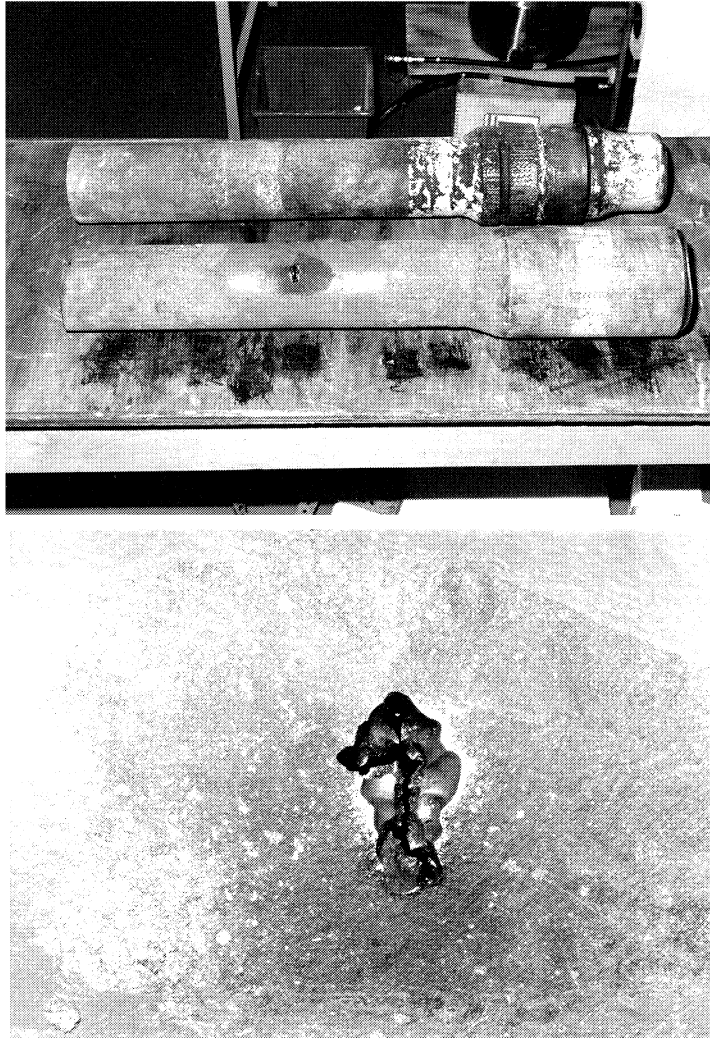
Example of washout failure in 5in. drillpipe. [3]
